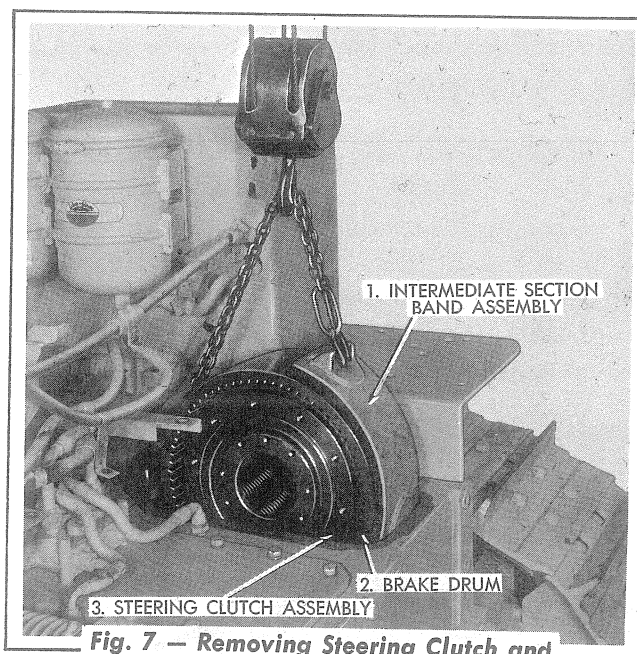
Removing Steering Clutch and Brake Drum Assembly
